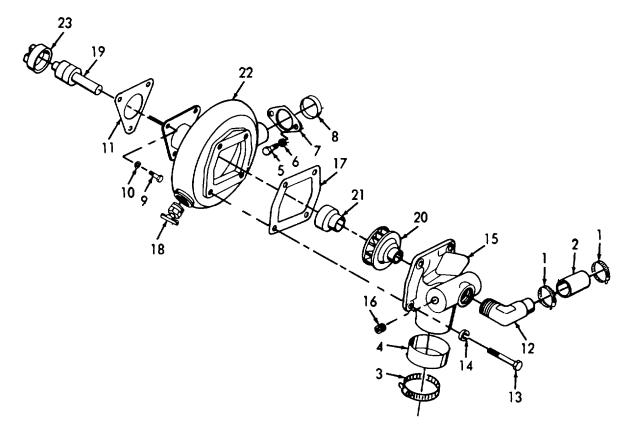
Water Pump, Removal, Disassembly, Reassembly, and Installation.
